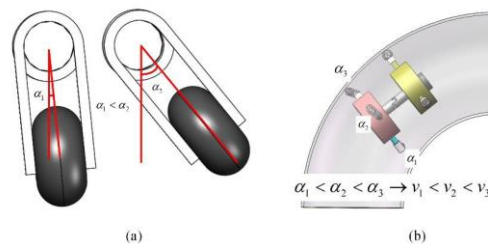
(c) Mechanism for the robot wheel setup [7]
